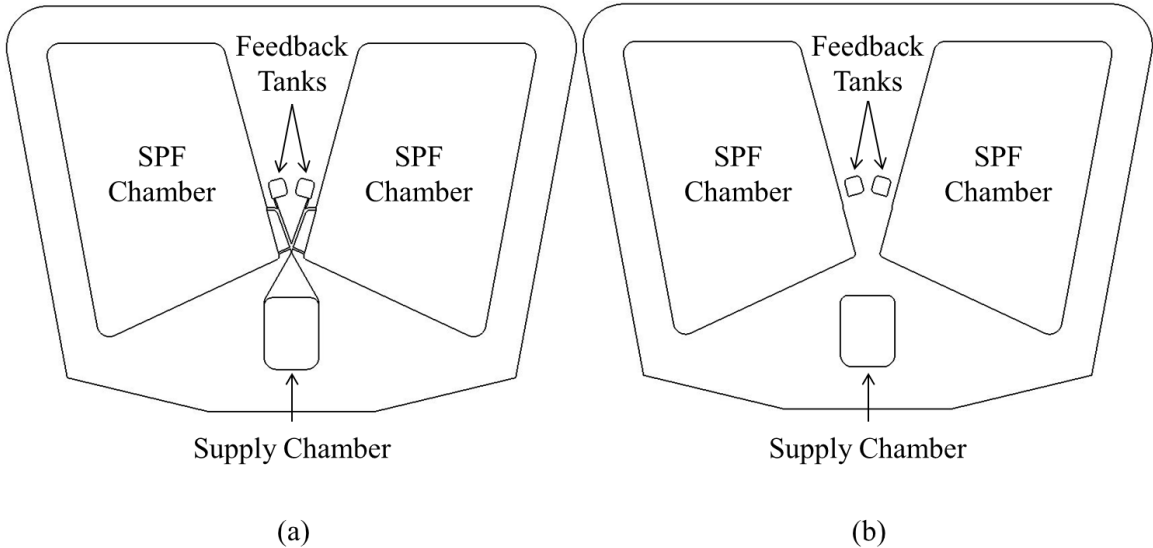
CAD files showing face views of the (a) top block and (b) bottom block
